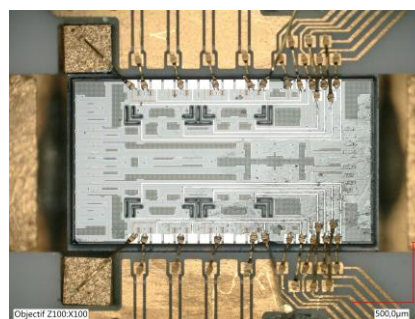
Zoom of the Alumina PCBs wedge-bonded to the PIC.
